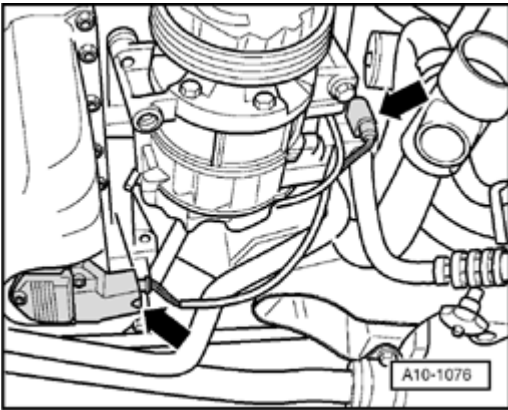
Disconnecting Compressor Clutch Connector From Air Conditioning Compressor & Oil Level Gauge Connector From Oil Pan
